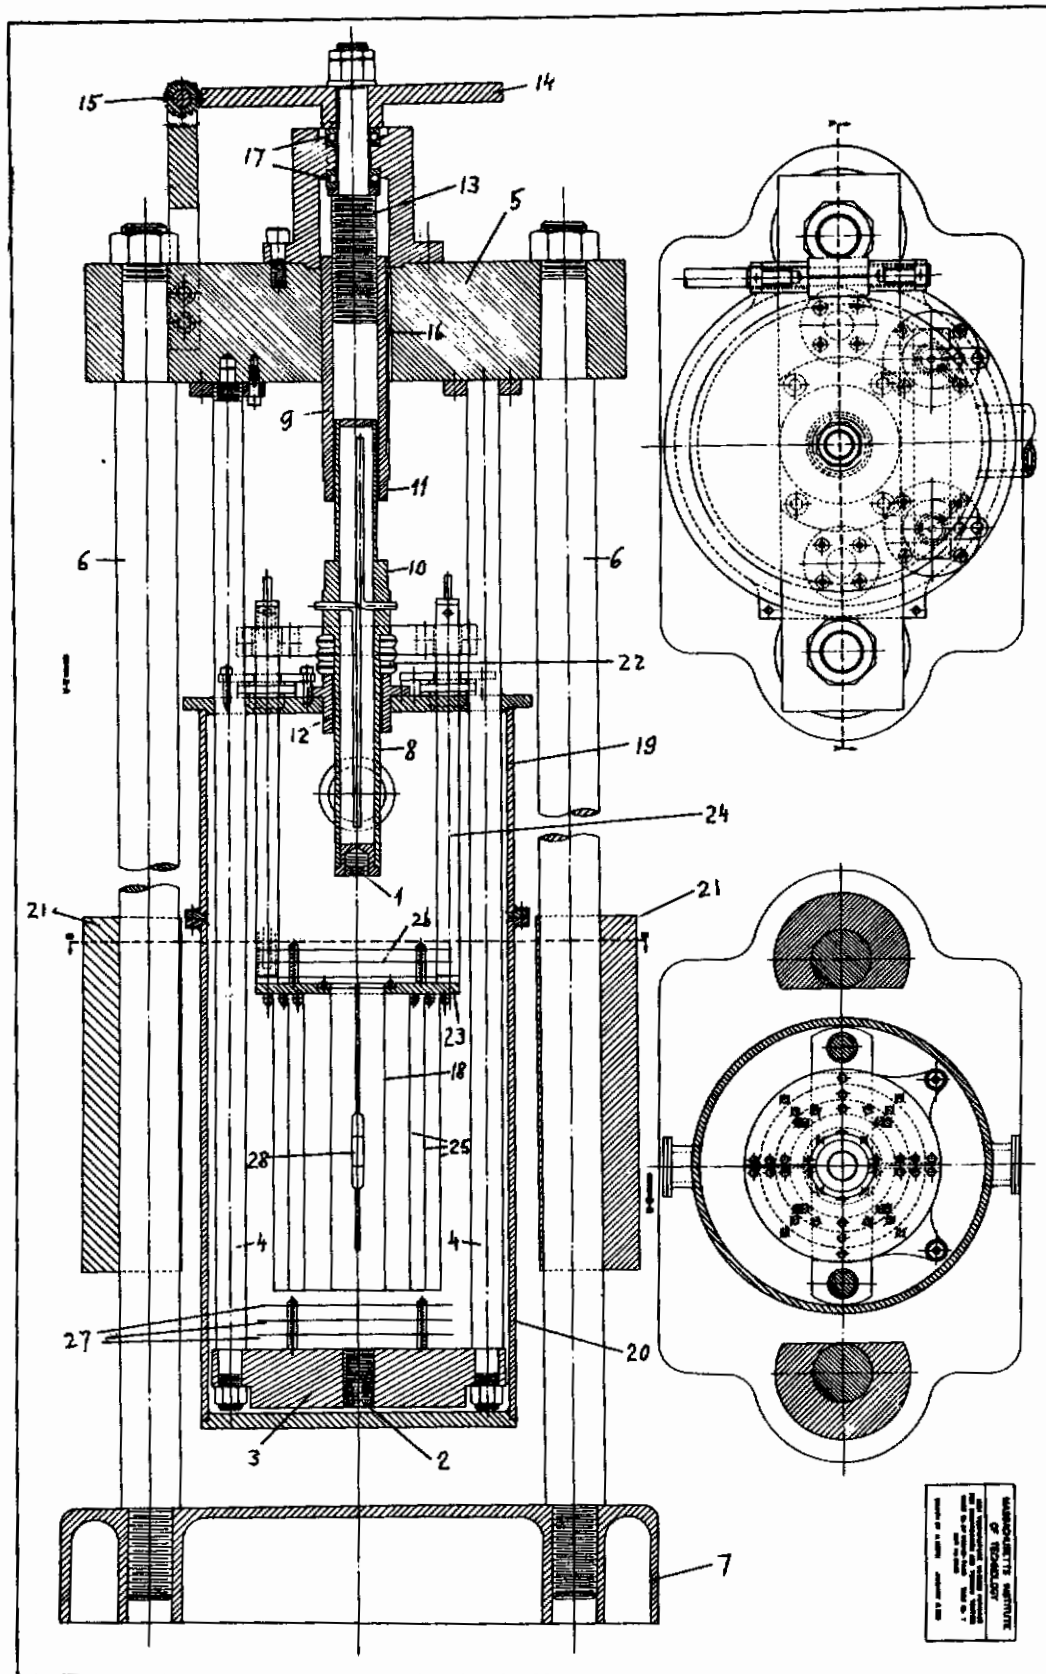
HIGH-TEMPERATURE VACUUM FURNACE FOR USE WITH 5000 LB TESTING MACHINE
